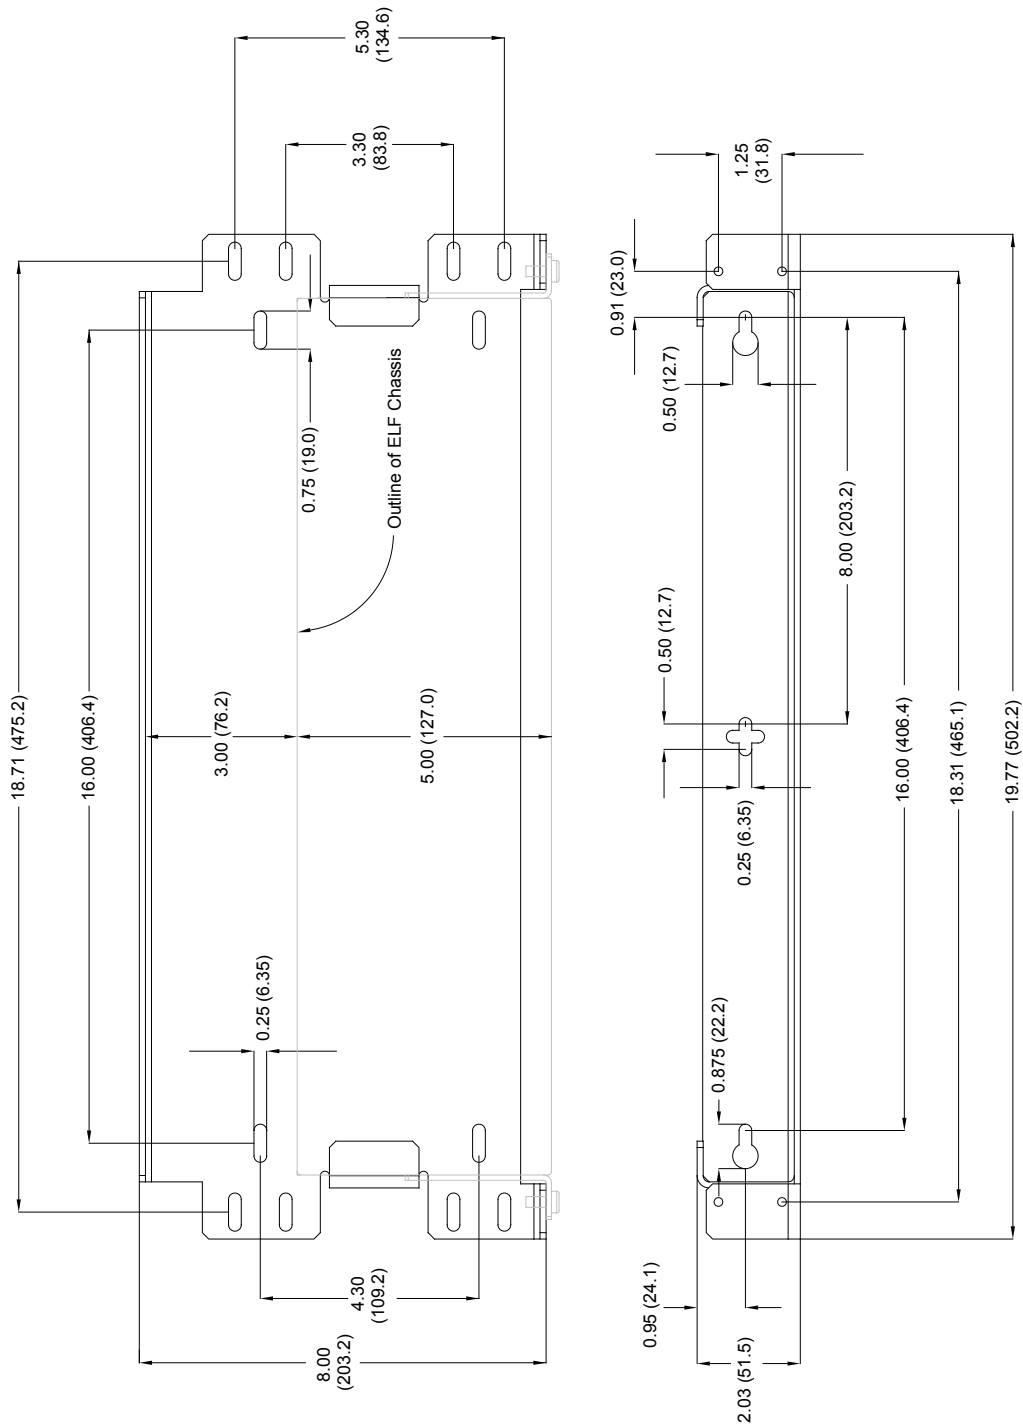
Wall-Mount ELF Chassis Bracket Dimensions
